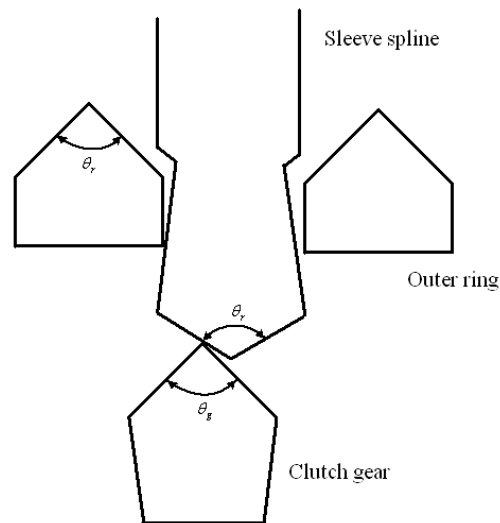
Geometric shape on splines of sleeve, outer ring, and clutch gear
